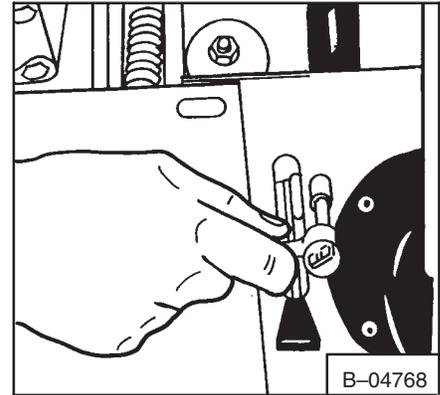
B-32 Removing The Eng. Mtg. Bolts
